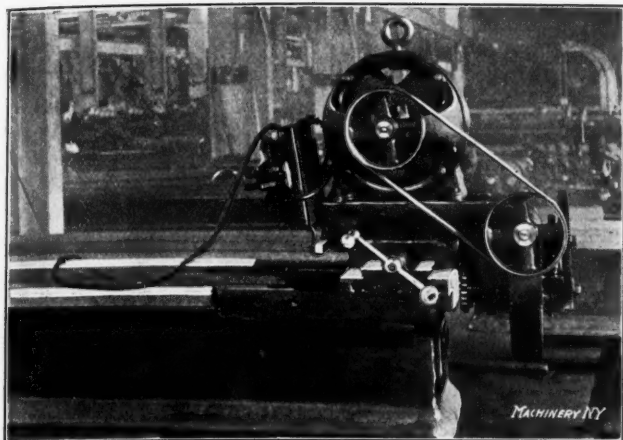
Portable Milling Machine for Facing Ends of Large Lathe Beds
